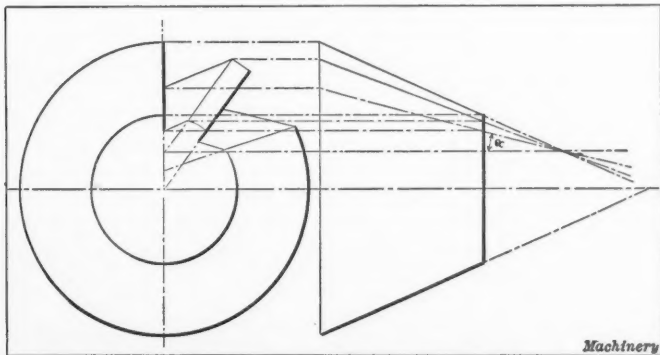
Diagrammatical Representation of Principles Involved in Milling Teeth in Angular Cutters
